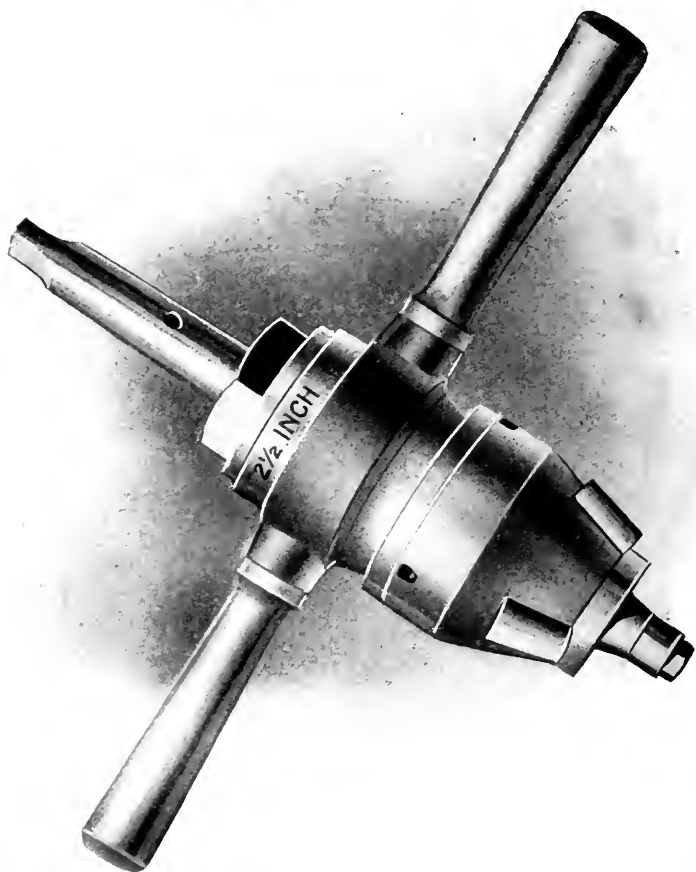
Lovekin patent boiler tube flaring or beveling tool.
